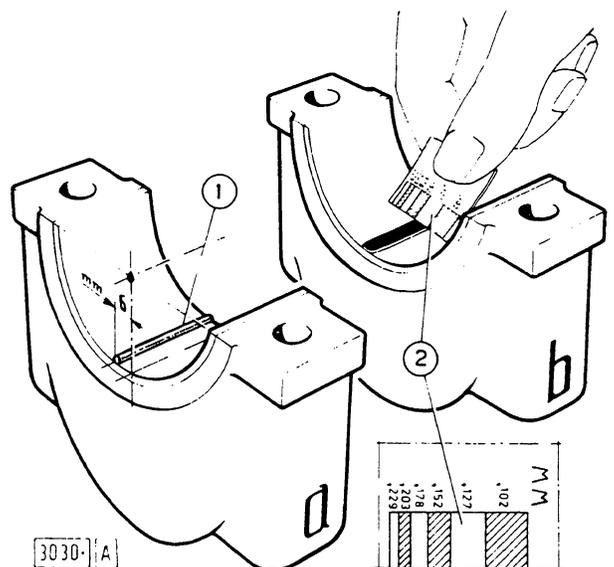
Checking Crankshaft Main Bearing Running Clearance
